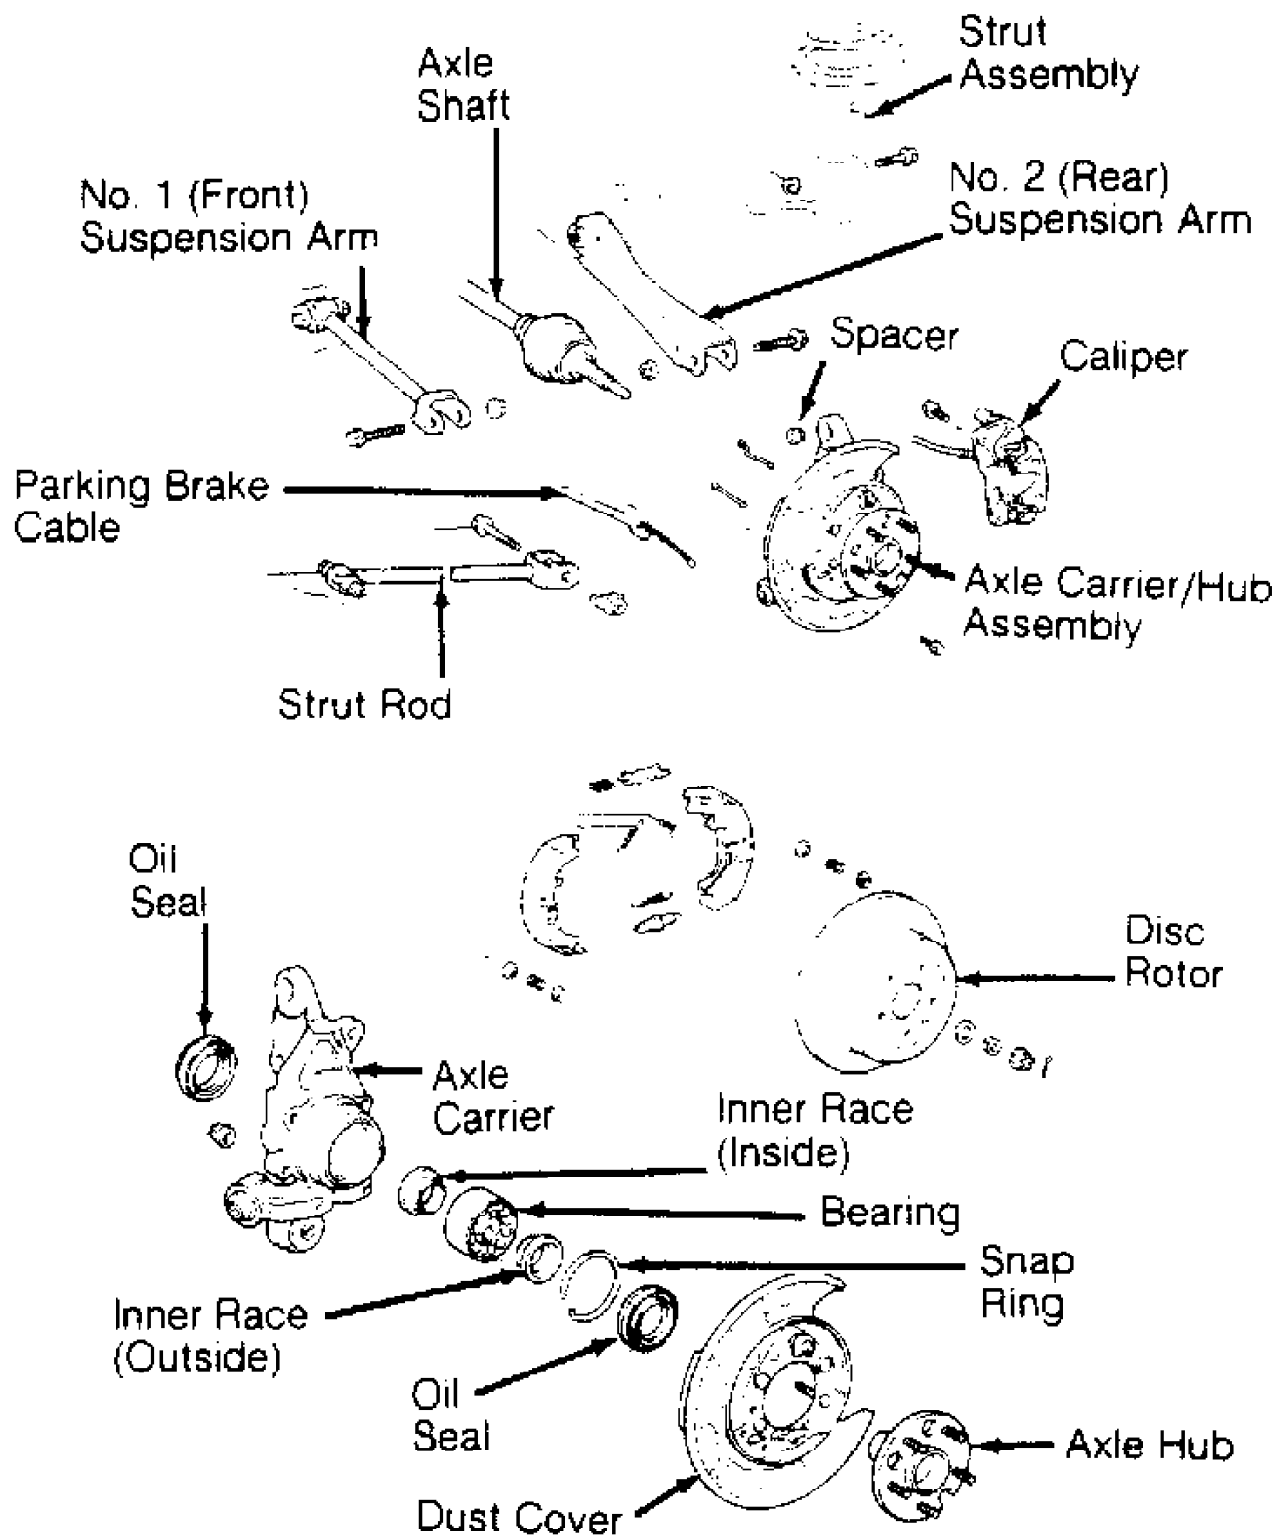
Exploded View Of Rear Axle Components (All-Trac)
